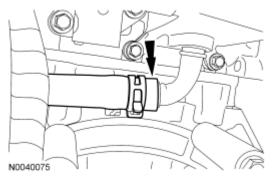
Locating Bypass Hose To Coolant Outlet Courtesy of FORD MOTOR CO.
